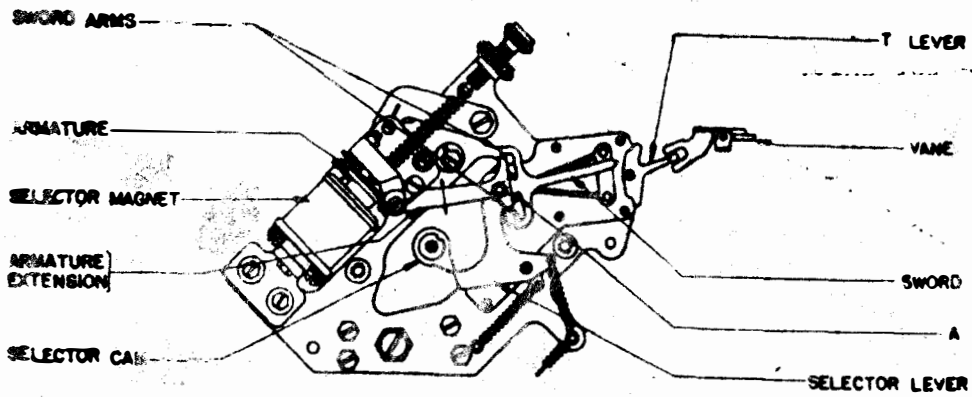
SIDE VIEW OF SELECTOR UNIT.
